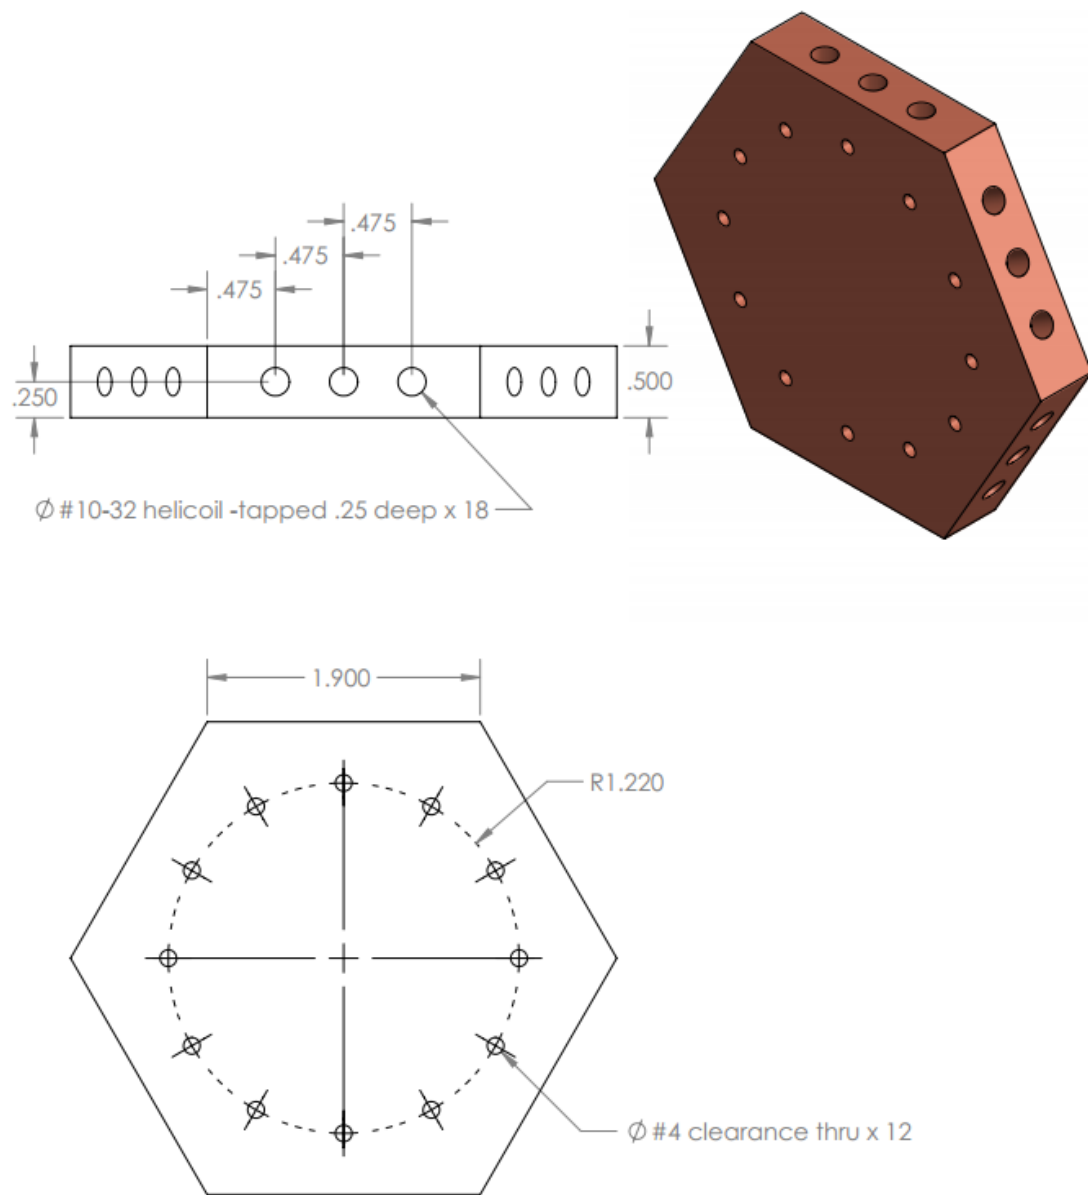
Experimental mounting stage for the mixing chamber insert.
